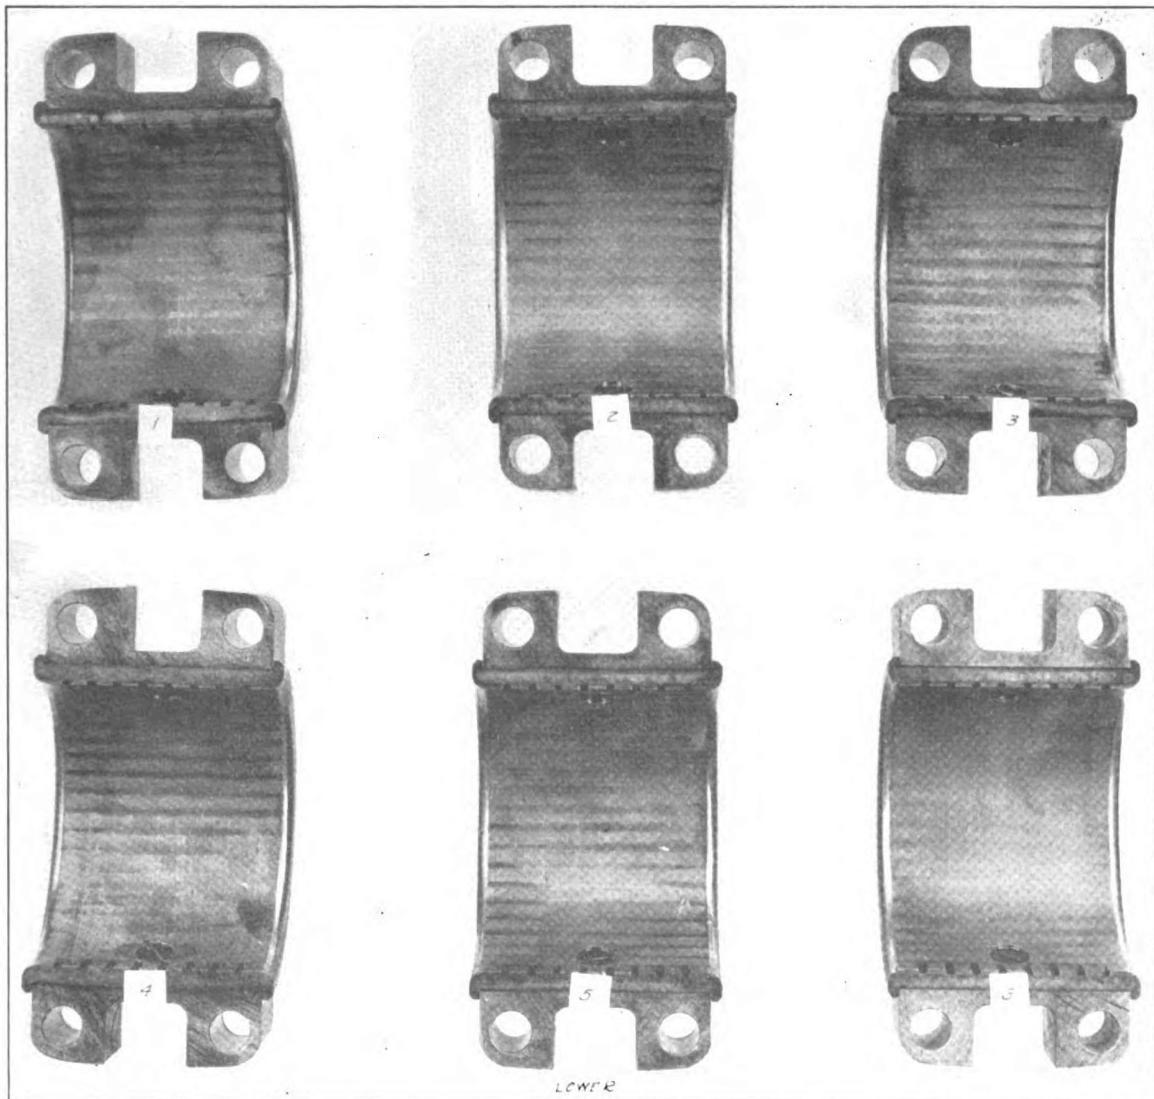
Lower connecting rod bearings after endurance run. Note original reamer marks made during assembly of engine.
